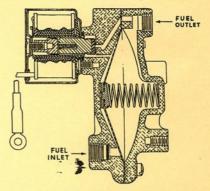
SECTIONAL VIEW OF FUEL SAFETY VALVE
